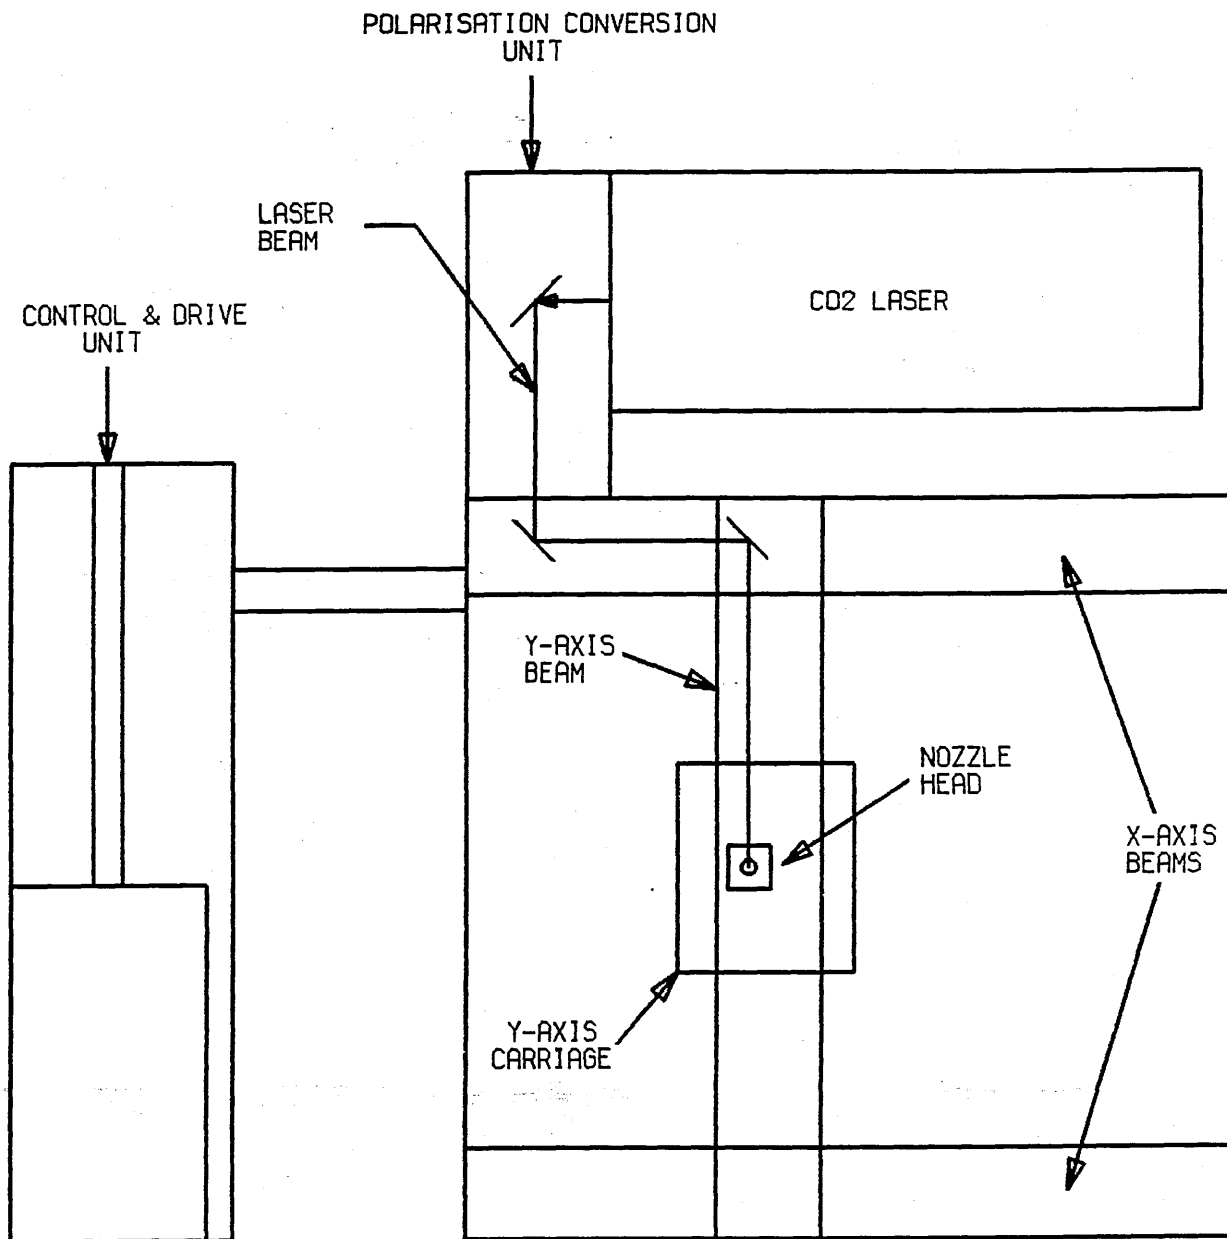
CONFIGURATION OF THE CO2 LASER CUTTING MACHINERY
